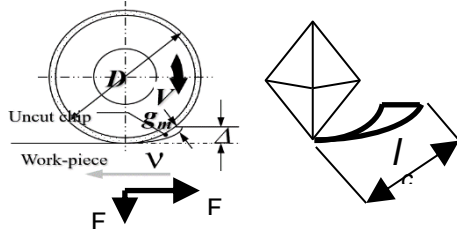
Grinding wheel-work interface behaviour and grit contact length, l_c
